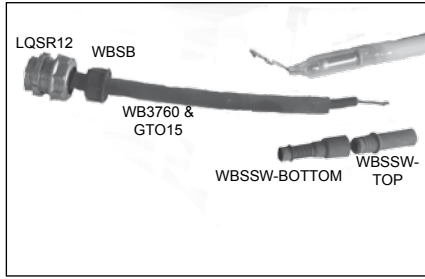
After taking wetbits short sleeve apart slide WBSB over WB3760 and GTO cable until you reach metallic bushing of LQSR12
